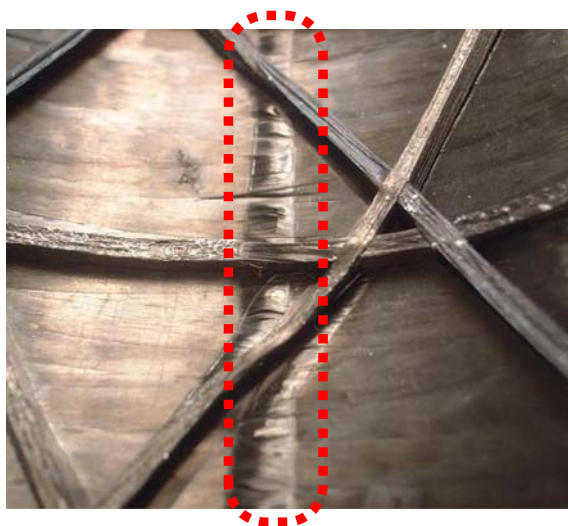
CFRP isogrid cylindrical shell fabricated by using the rectangle-shaped silicone rubber female mold.
